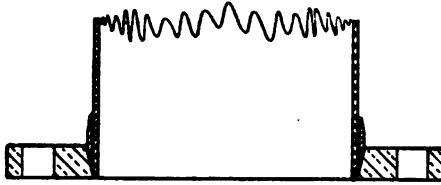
Plain Flange with Sleeve for Copper Pipe.
